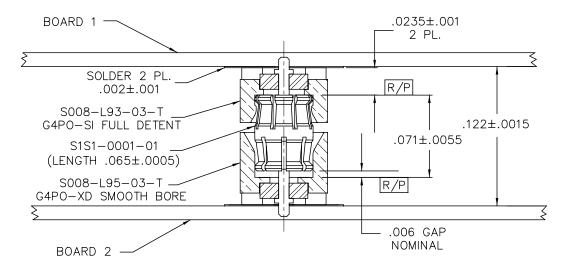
G4PO Board-to-Board Tolerance Analysis
